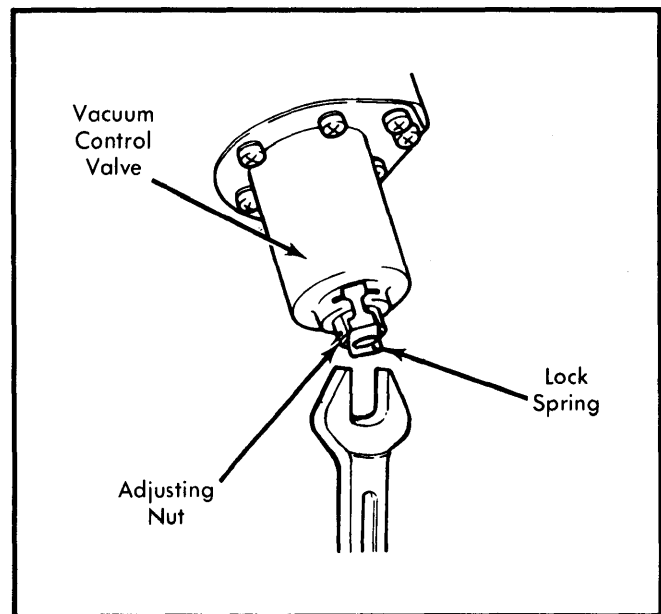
Adjusting Throttle Opener Control System Operating Pressure
